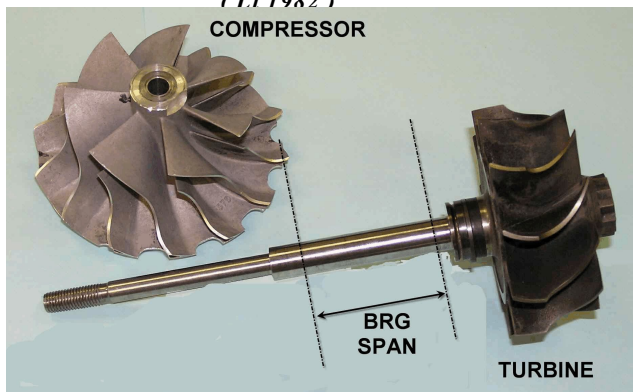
Disassembled Turbocharger Showing Compressor Wheel And Bearing Span
